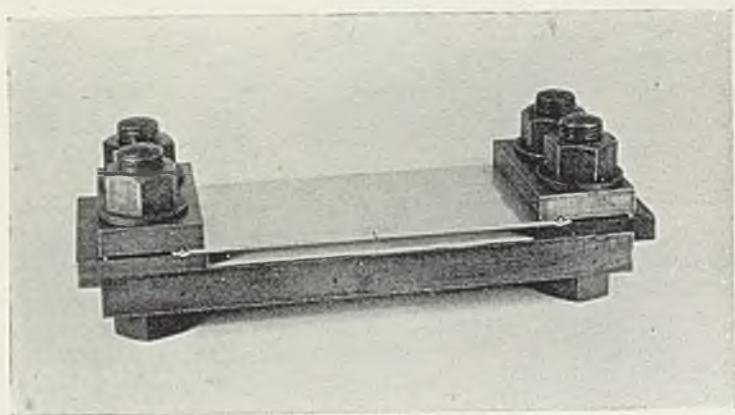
Jig Used for Clamped Weld Experiments.
